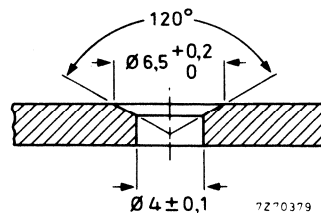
Shape of hole for 500 V insulation, nut fastening.
